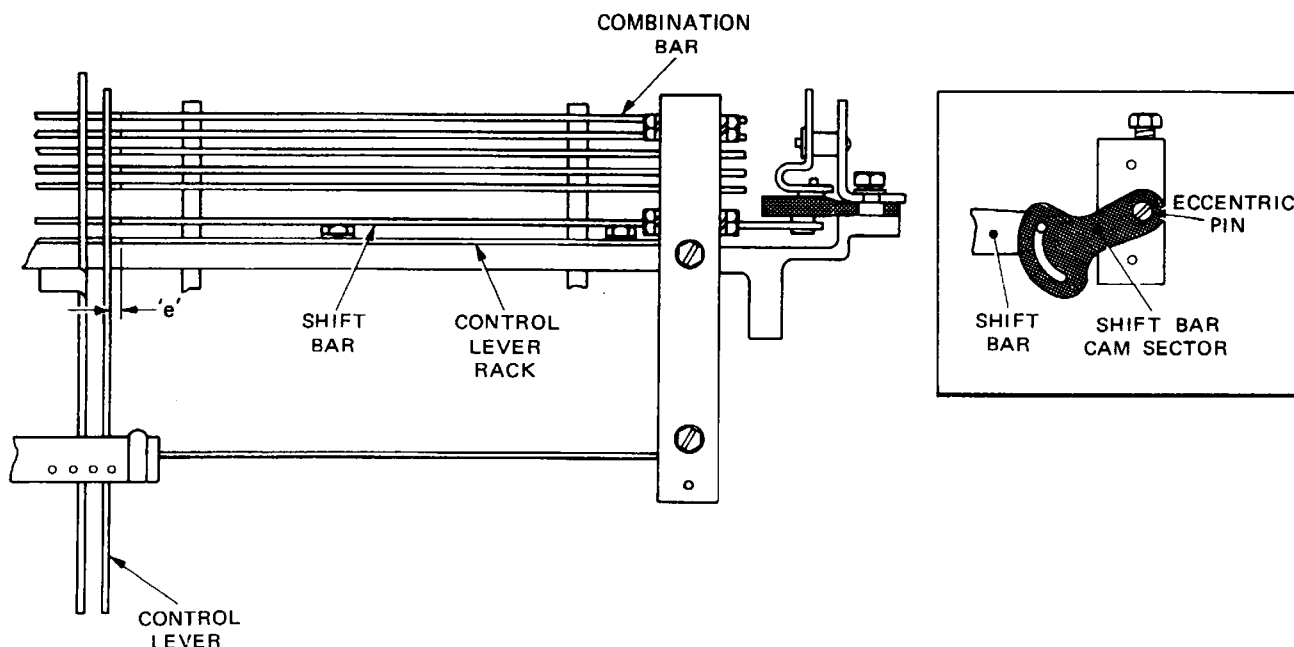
CODE CONTROL UNIT (UNDERSIDE VIEW)
